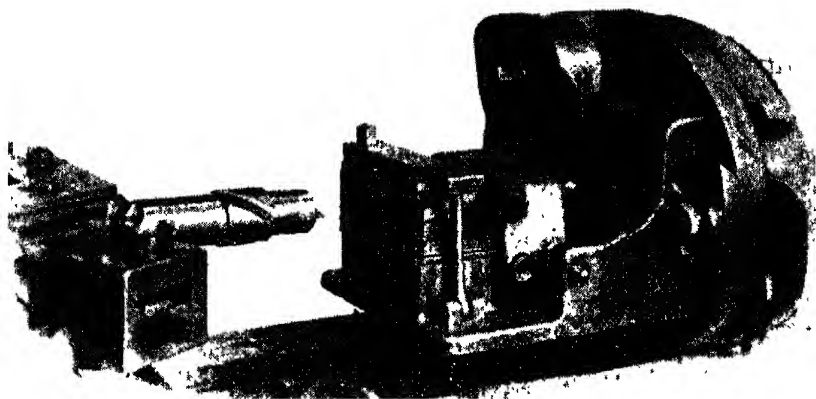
A. CLOSE-UP VIEW OF MACHINE ILLUSTRATED IN FIG. 47, SHOWING DETAILS OF THE SLIDING JIG PLATE
